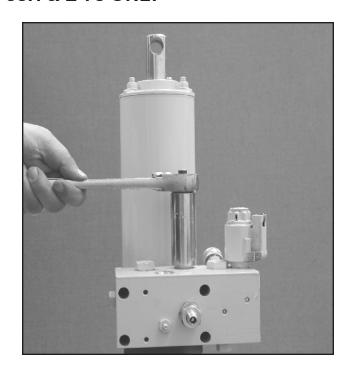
The "B" Cartridge is removed using a 7/8" hex deep socket.
